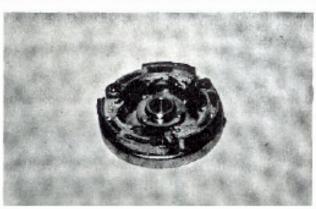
When it becomes necessary to replace the clutch housing bearing, the housing should be heated to 80-90 degrees Centigrade, 176-194 degrees F. Once the above checks have been completed, the engine can then be assembled.
